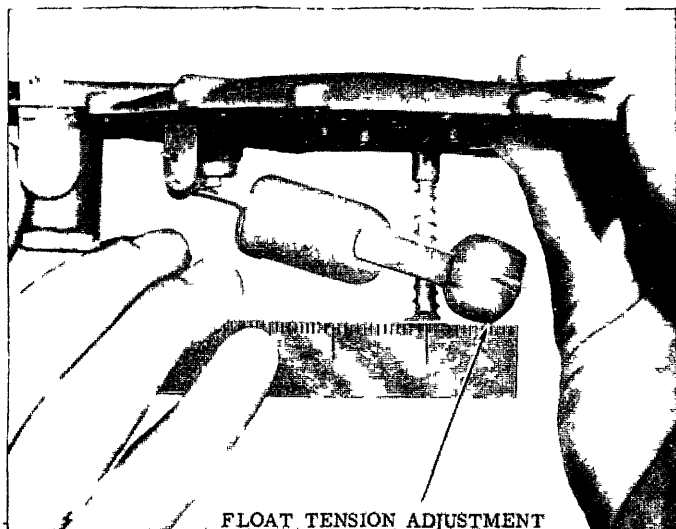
A Float tension adjustment on Rochester Oldsmobile 1949-50 carburetor
